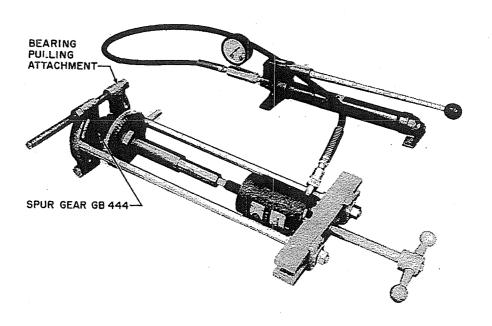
4 to 1 Shaft, Installation of Spur Gear GB444
